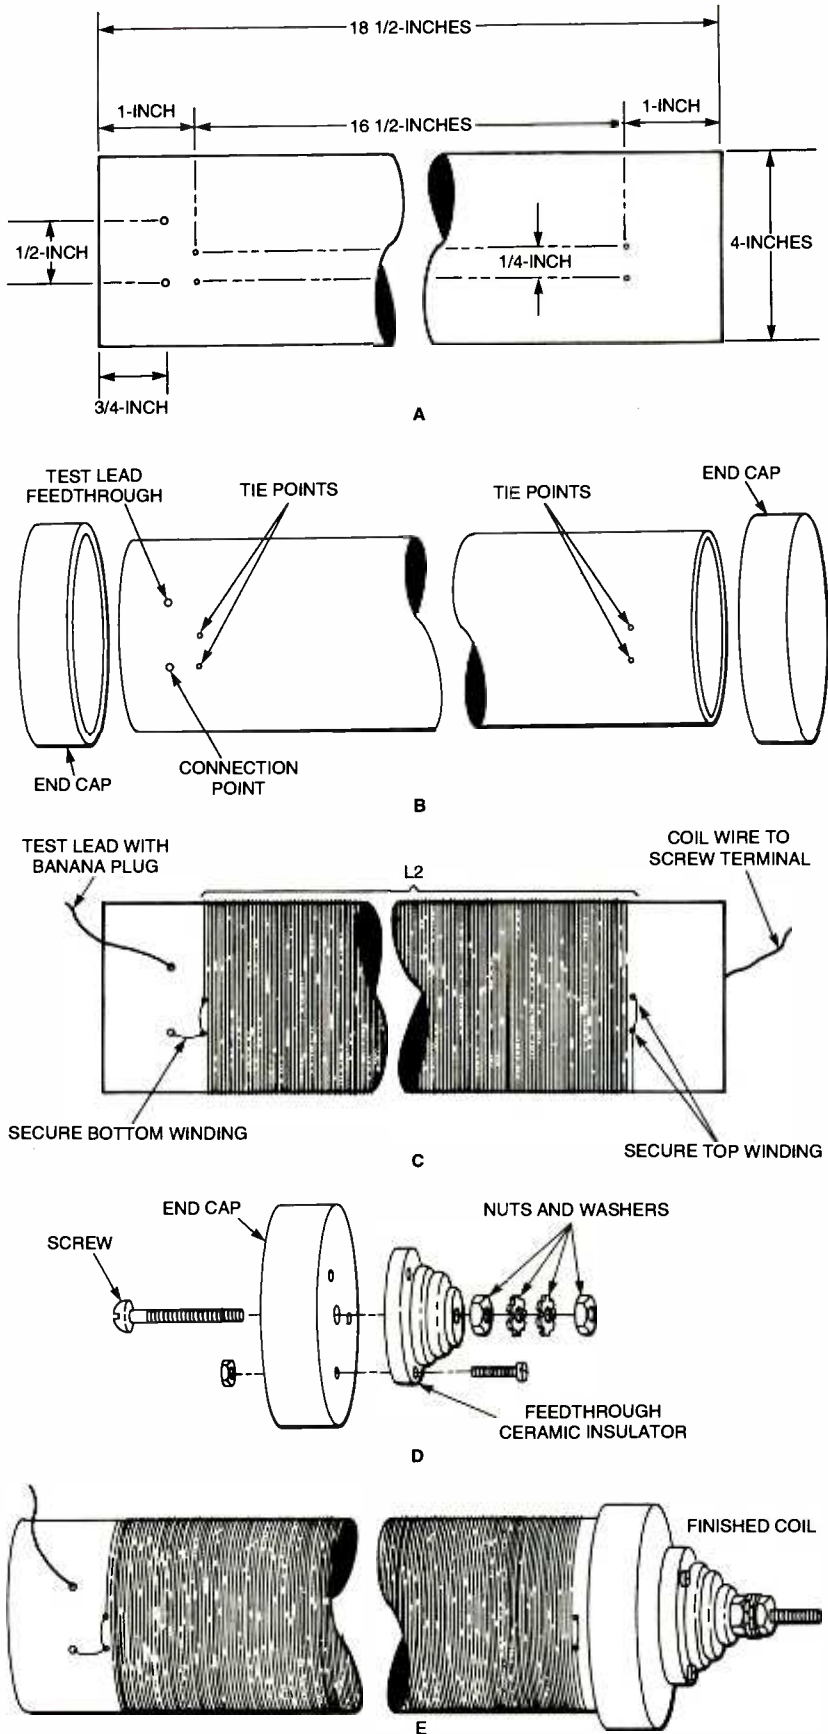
The tower (or secondary) coil was wound on an 18½-inch length of PVC pipe. Shown here are fabrication details of the tower-coil assembly.
